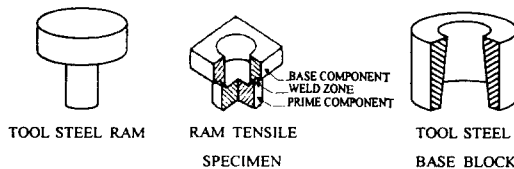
Machined explosion-clad test sample and fixture for ram tensile testing of bond zone
